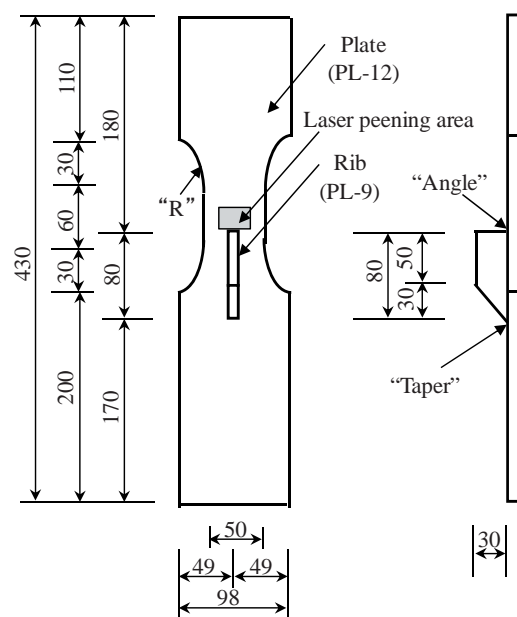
Fillet welded specimen for fatigue test.
